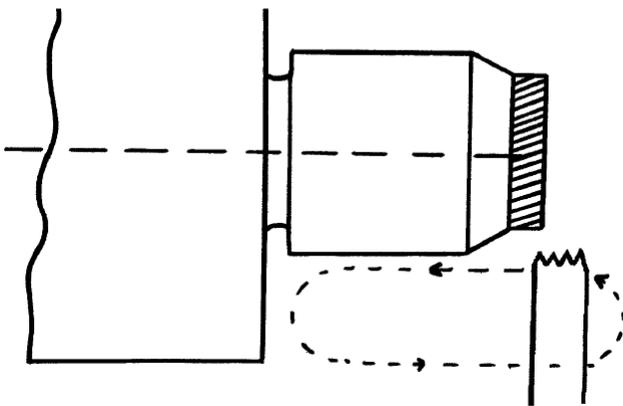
This drawing illustrates the movement of the chaser as it cuts the thread. The chaser should just cut into the recess and then be lifted clear of the wood before the chaser comes in contact with the shoulder. When the chaser just marks the shaded tenon, the thread should be ready to receive the inside threaded piece.
